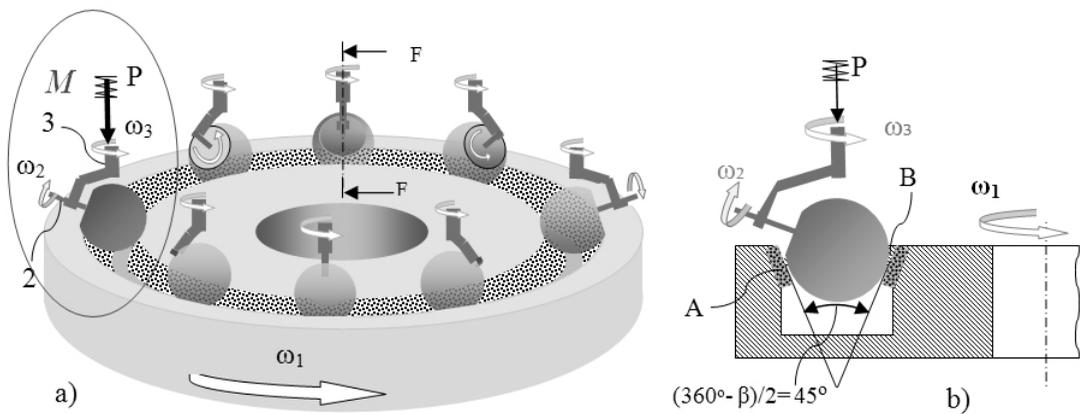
Scheme of forming a partial spherical head by shaped grinding wheel (on the basis of LPG method).
